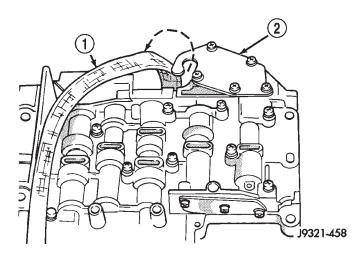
Solenoid Harness Routing 1 – OVERDRIVE/CONVERTER SOLENOID WIRE HARNESS 2 – 3–4 ACCUMULATOR COVER PLATE
